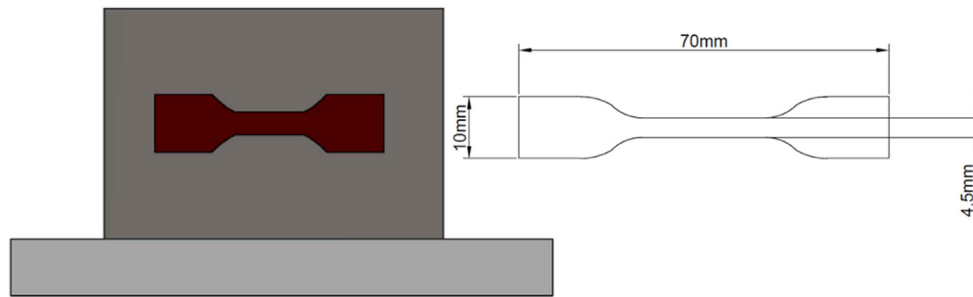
Schematic drawing of the extraction of the samples by EDM, geometry and sample dimensions.
